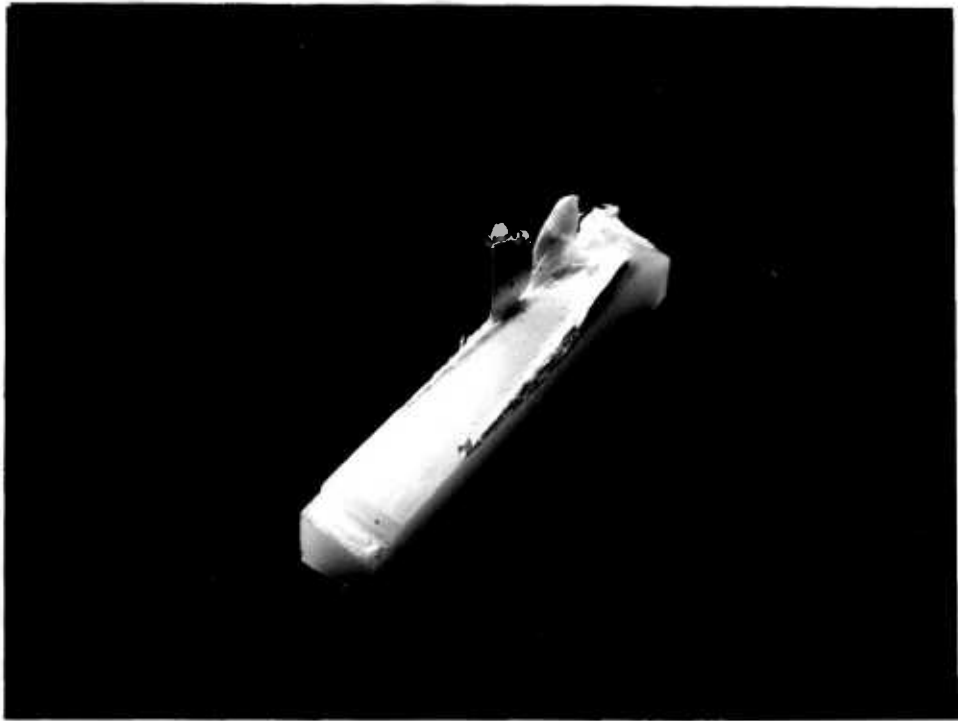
FRACTURE SURFACE OF EARLY SPECIMEN SHOWING SIDE YIELDING
